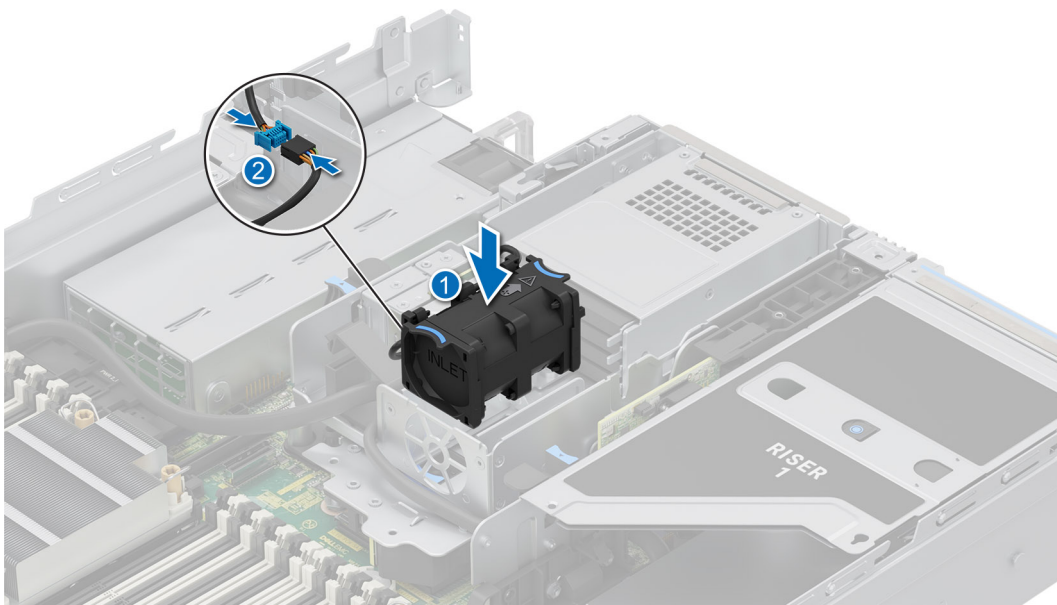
Installing the EDSFF E3.S rear drive module cooling fan
